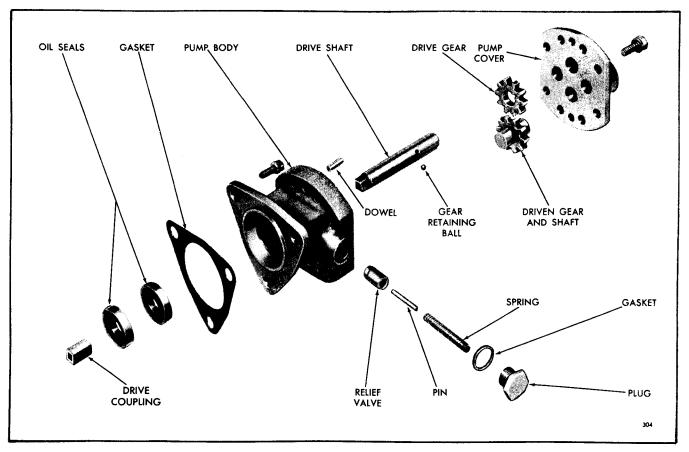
Fuel Pump Details and Relative Location of Parts (Right Hand Pump Shown)
